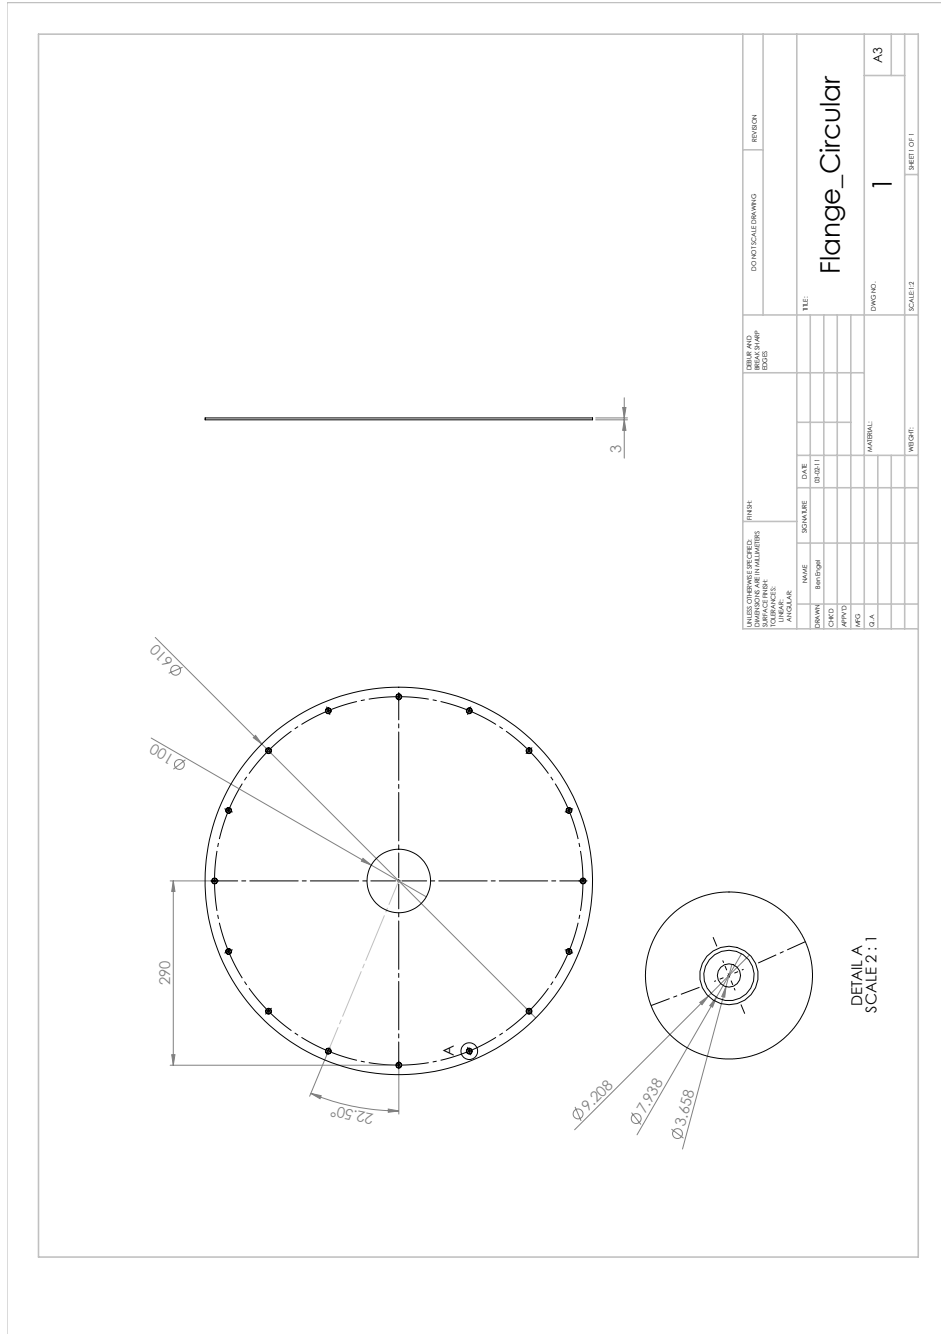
Technical Drawing of Prototype VFC Unit for Testing at Clevedon [9]
